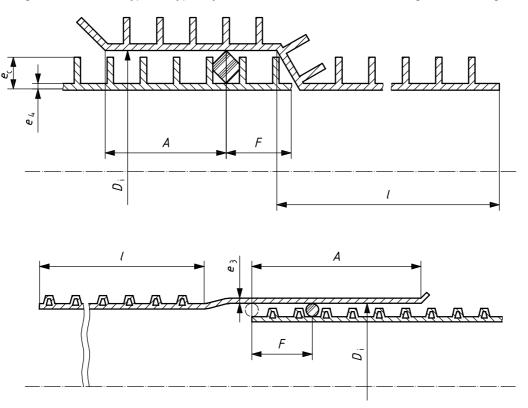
Typical examples of elastomeric sealing ring joints with the sealing ring located on the spigot, Type B
